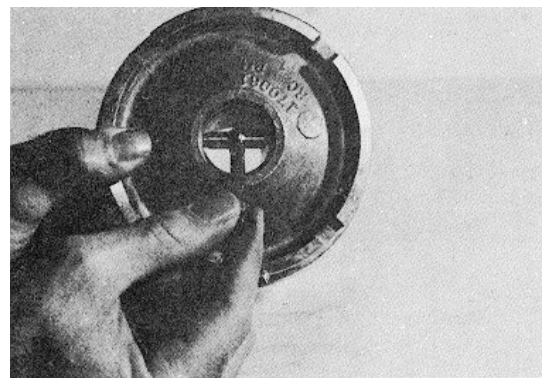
, T-365. Checking sealing ring bore in bearing housing
